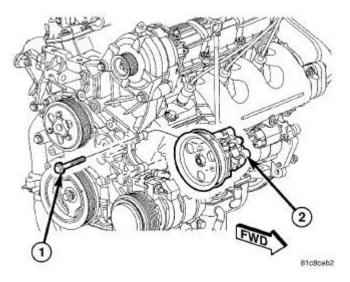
Removing/Installing Accessory Drive Belt Tensioner Courtesy of CHRYSLER LLC
